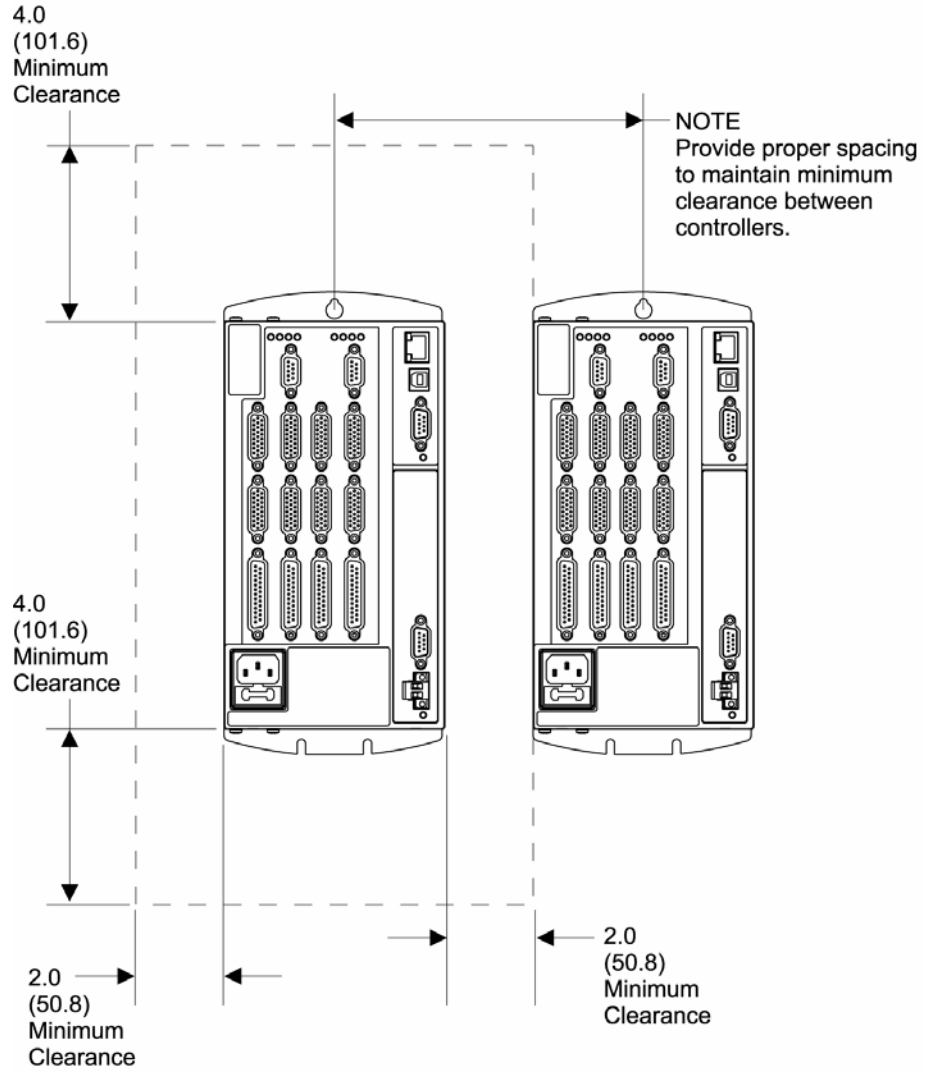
6/8 Axis Configuration Panel Layout Dimensions
